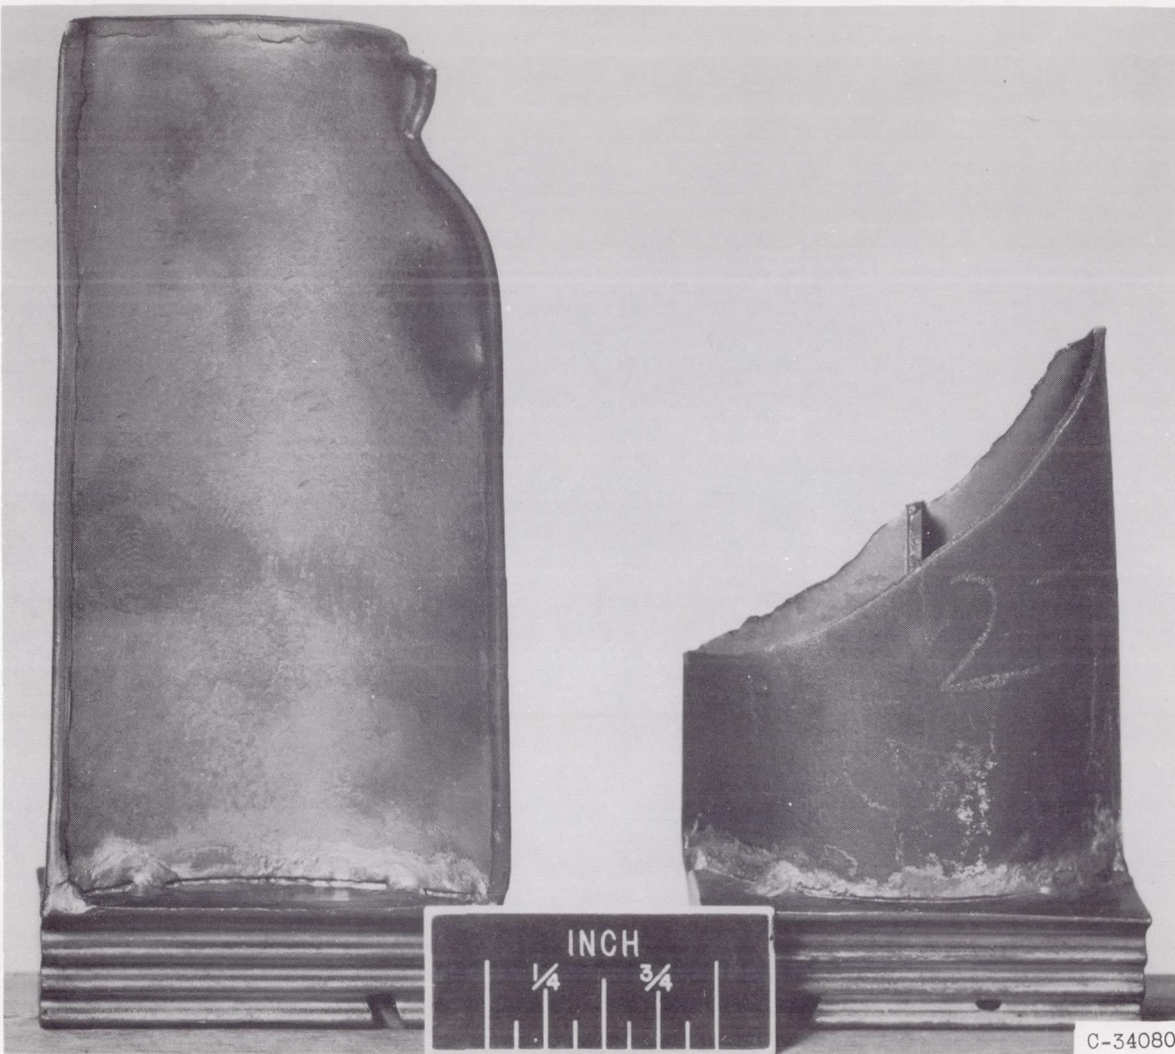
Failure of L-605 airfoil (0.030-in. wall thickness) and similar blade with impact damage.
